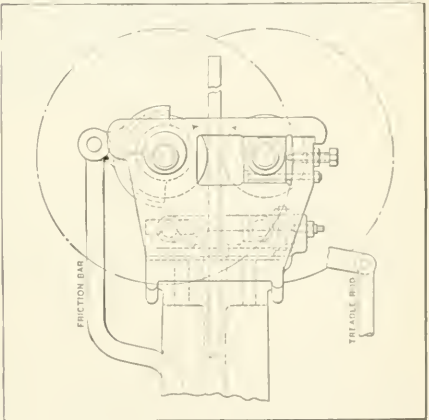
Lifting Head having eccentrically mounted Front Roll and Bolt Adjustment for Rear Roll
